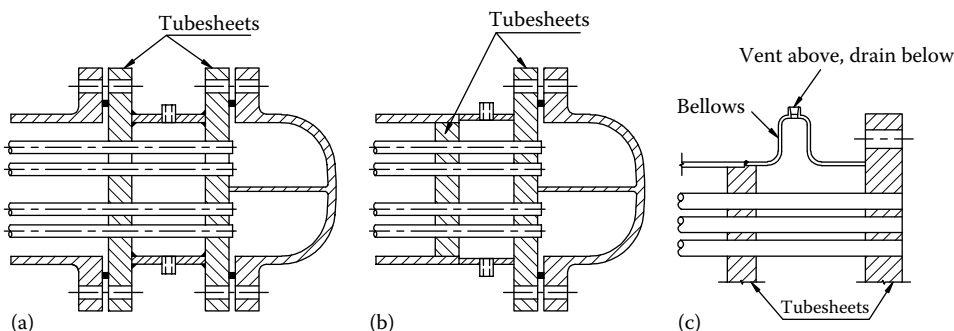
Double tubesheet shell and tube heat exchanger—schematic. (a) Removable tube bundle with light gauge shroud between two tubesheets, (b) fixed tubesheets with light gauge shroud, and (c) fixed tubesheet with bellows.
